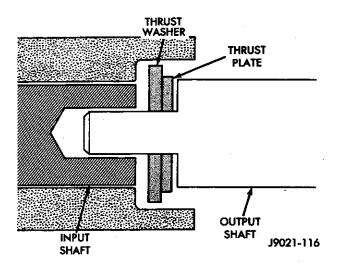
No. 3 Thrust Washer And Output Shaft Thrust Plate Position
